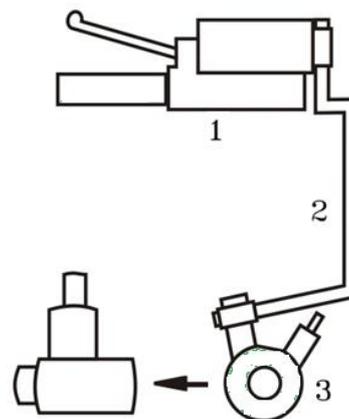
Main parts of the hydraulic clutch mechanism: (1) master cylinder, (2) fluid hose, and (3) release cylinder
